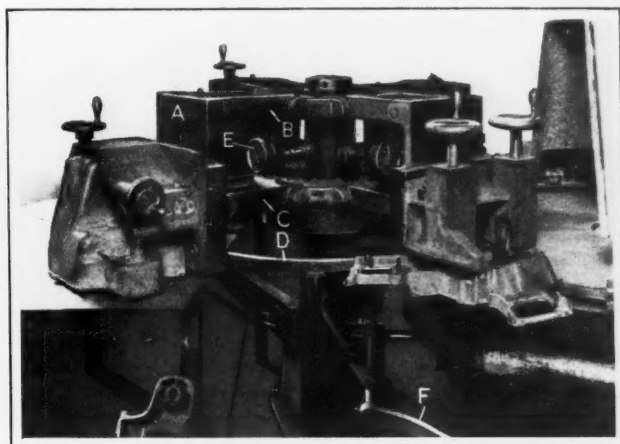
Vertical-spindle Machine Arranged for Grinding Four Different Parts in Sequence
